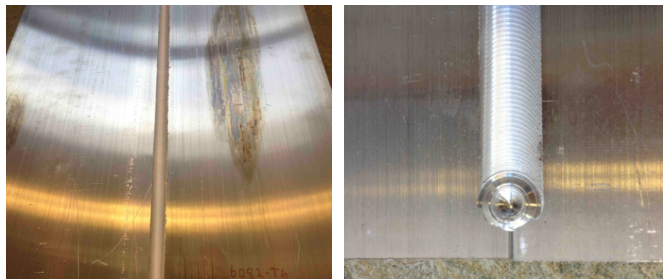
Photographs of the FS welded sheets received from Marine Aluminium.
